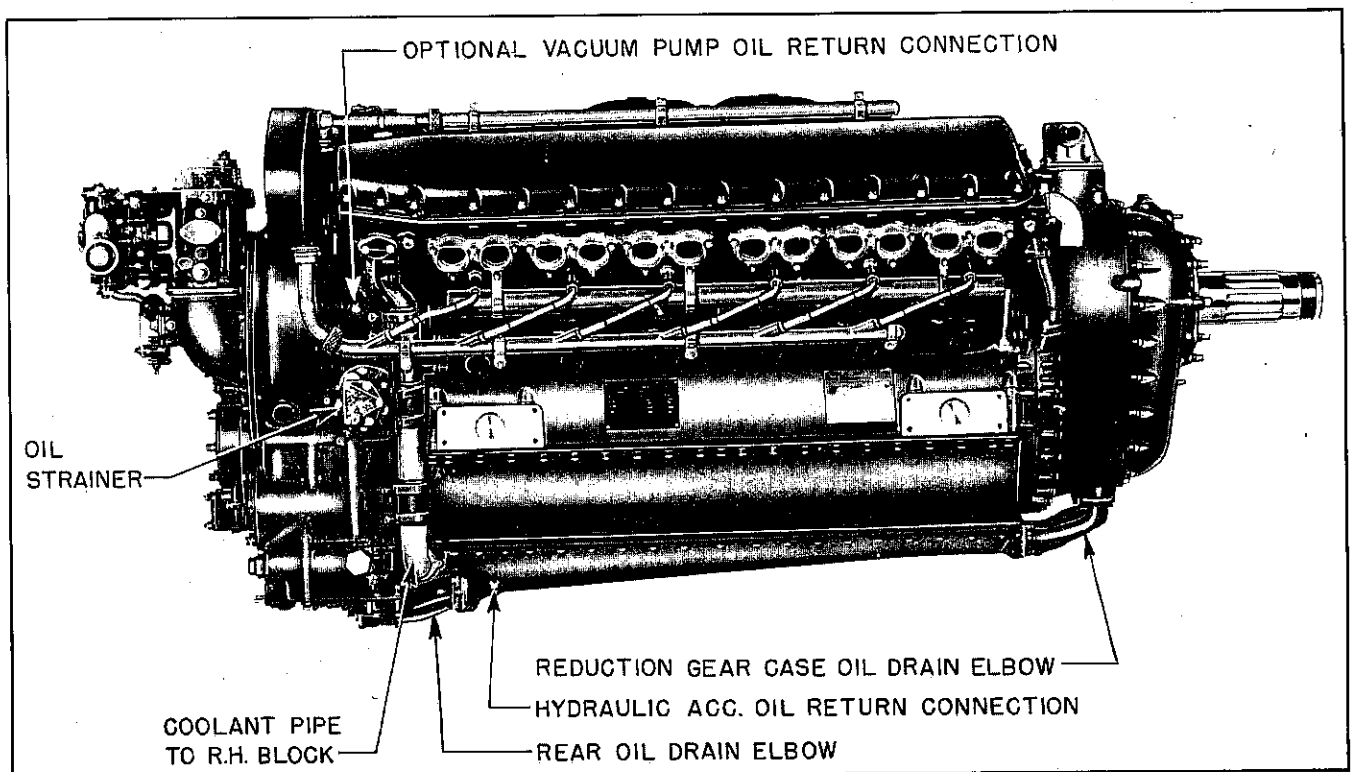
Right Side View of V-1710-F10R or F10L Model Engine.
